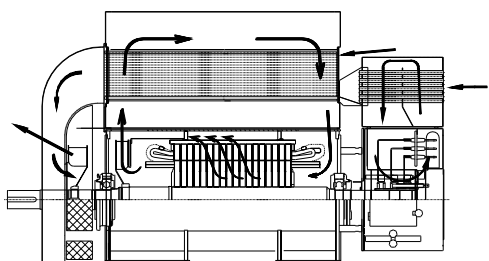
Air-to-air cooled machine IC611 IP55 / TEAAC.
